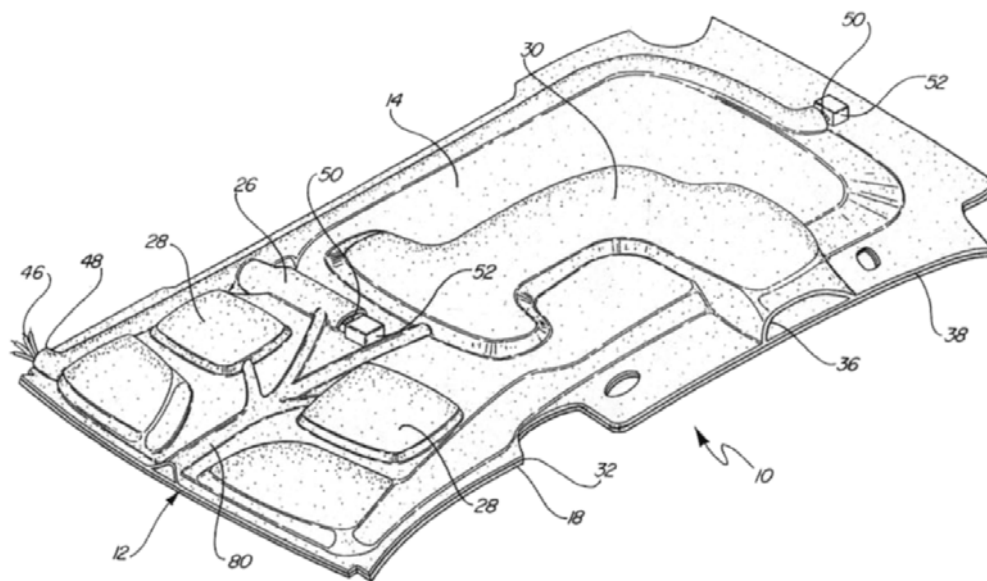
Automotive headliner assembly concept with integrated air and wiring ductwork, molded as a one-piece array (*Phase I proposal*)
